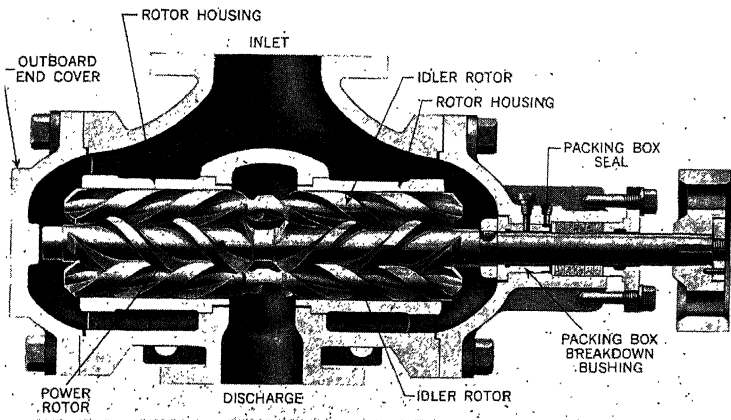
Sectional view through gear-type oil pump. (Courtesy of De Laval Steam Turbine Company.)
